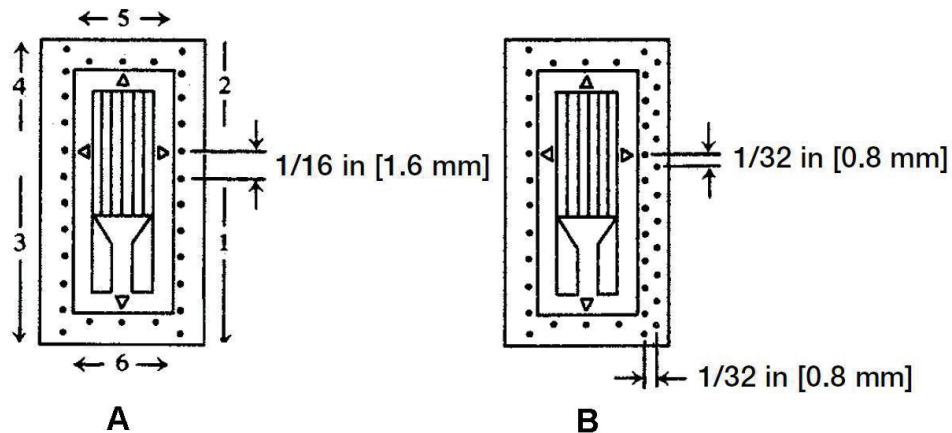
Welding pattern (Vishay 2010)
